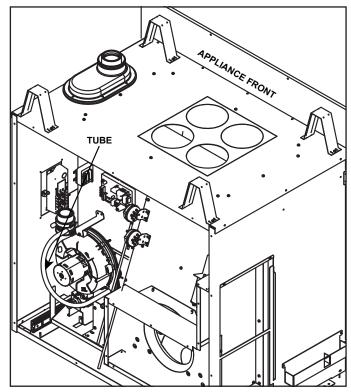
Upper Inducer Housing Tube - Connected to Inducer
